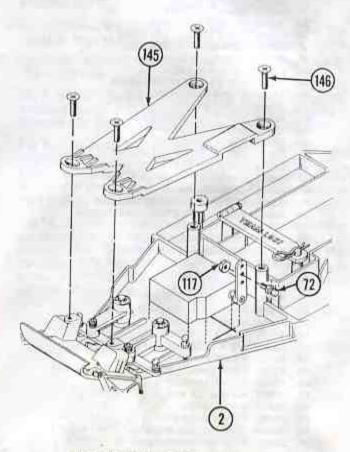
Attach steering servo using servo tape (53) to front of chassis (2) as shown. Thread an adjustable rod end (70) onto both sides of 1 1/2" threaded rod (119). Thread one 3/16" studded ball (72) into steering servo arm and secure with a 4-40 nut (117). Attach one end of 1 1/2" rod (119) onto studded ball (55) in steering bellcrank (75) and other end onto studded ball (72) in steering servo arm. Secure front stiffener (145) to chassis (2) using four 8-32 x 1/2" steel flathead screws (146).
